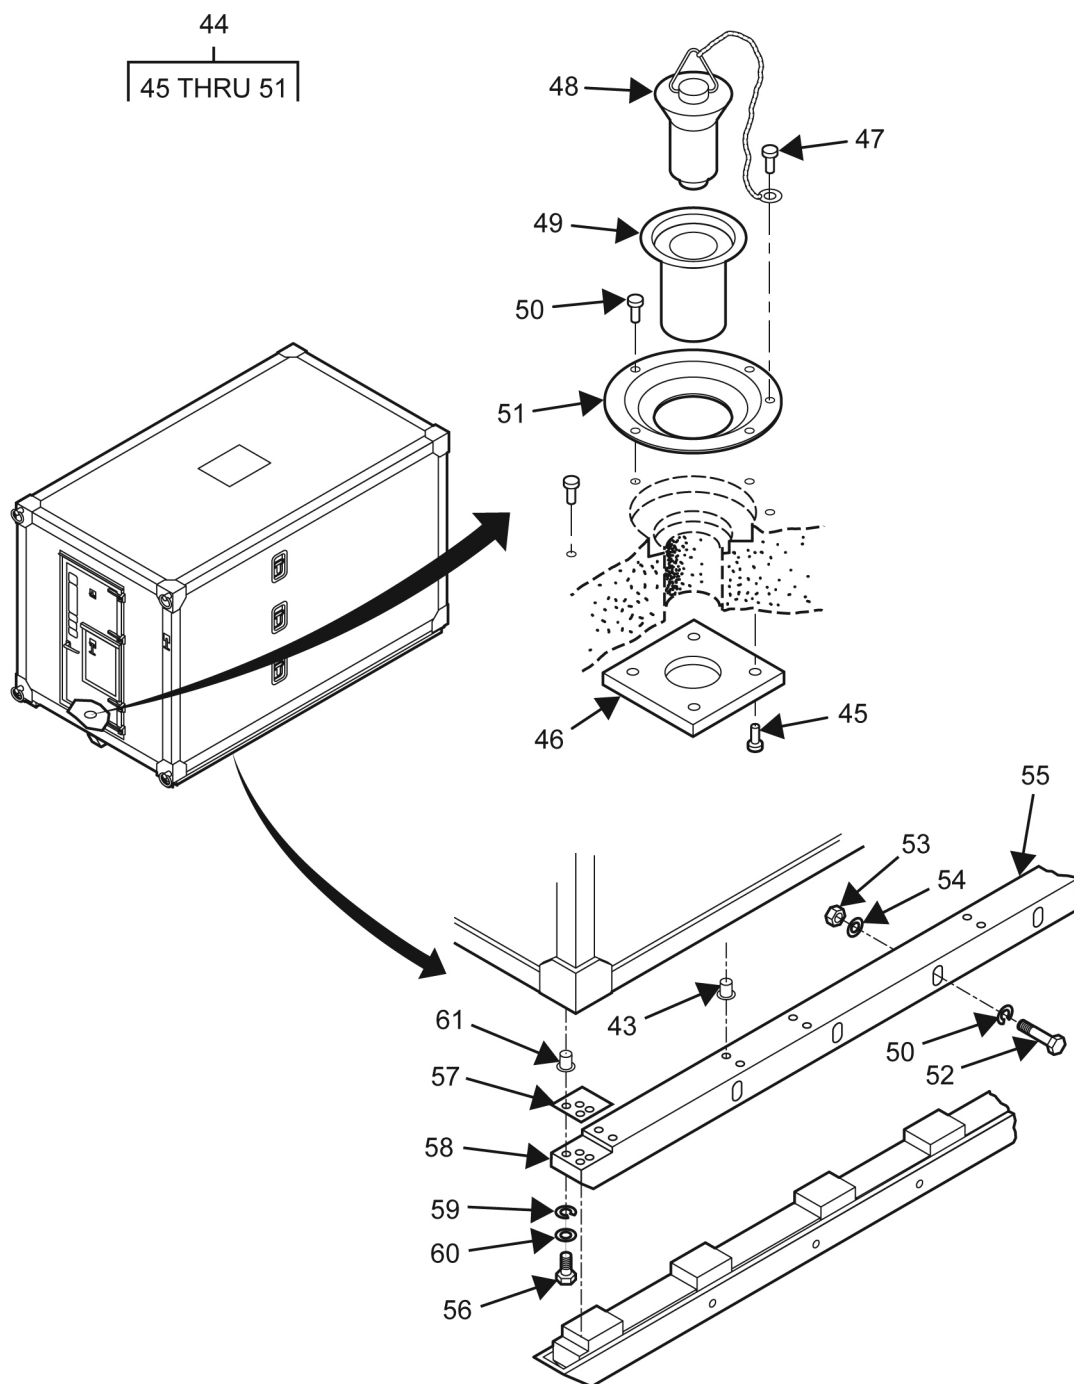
Shelter, Electrical Equipment S-280 (Sheet 3 of 3).
